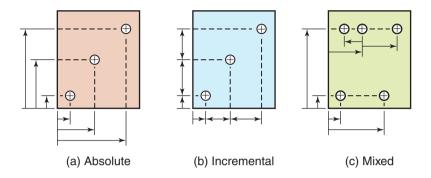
Positions of drilled holes in a workpiece. Three methods of measurements are shown: (a) Absolute dimensioning, referenced from one point at the lower left of the part; (b) Incremental dimensioning, made sequentially from one hole to another; and (c) Mixed dimensioning, a combination of both methods.
